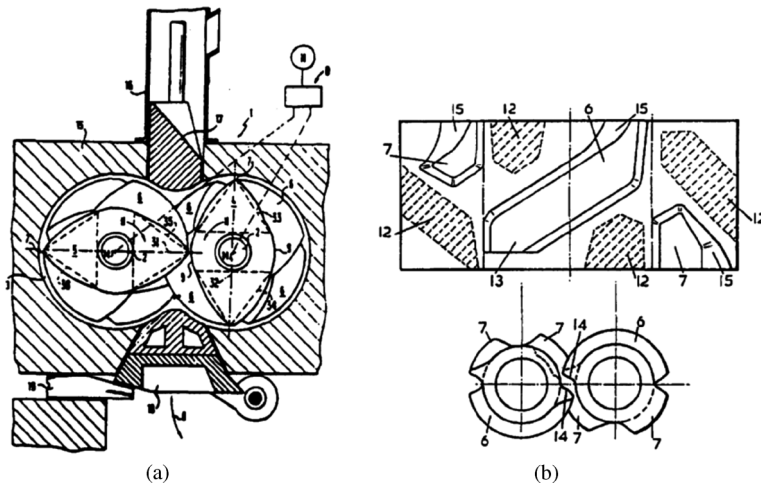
Post-Cooke intermeshing internal mixer rotors: (a) Millauer [53]; (b) Johnson *et al.* [54].
